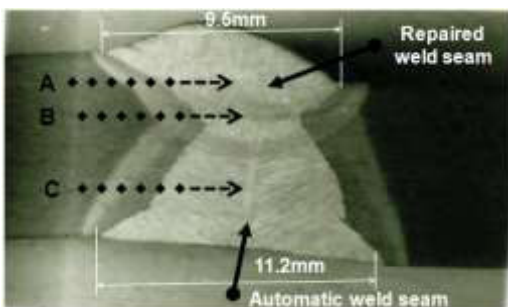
Macrography of repaired weld joint and hardness measurements positions
